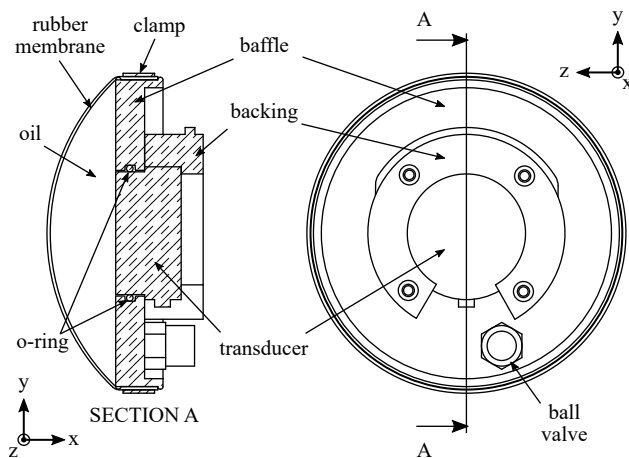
Section-view drawing of a removable oil-filled CARL transducer.
